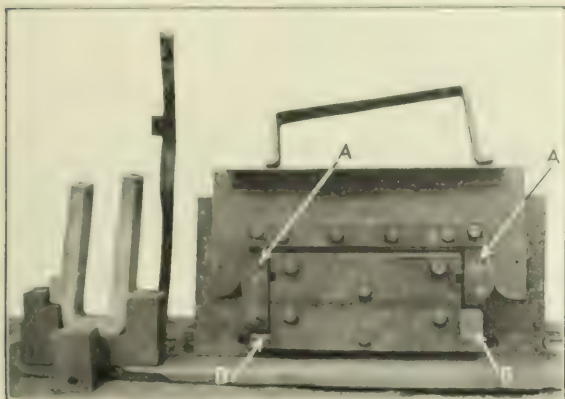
Dies for Bending Main Rod Straps under a Steam Hammer and for Forging Coal Car Hopper Carrier Irons.
